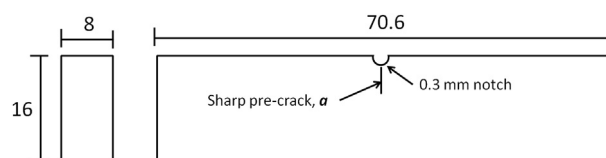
Schematic of a fracture toughness test specimen (dimensions in mm).
